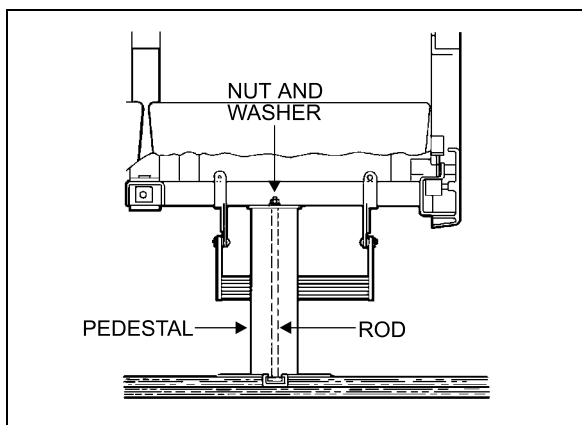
SEAT PEDESTAL ASSEMBLY
